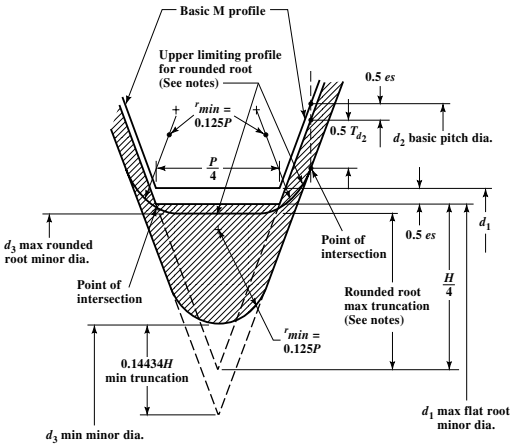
M Profile, External Thread Root, Upper and Lower Limiting Profiles for  $r_{min} = 0.125 P$  and for Flat Root (Shown for Tolerance Position g)
